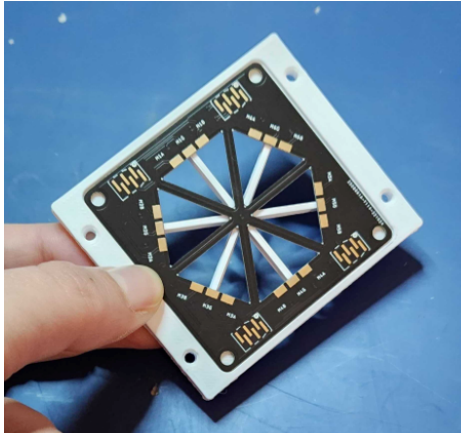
Photographs of the 3D printed chuck for wire bonding to both sides of the PCB.
